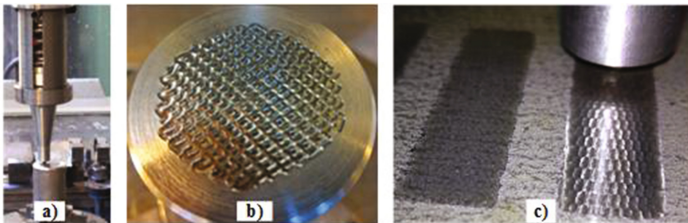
(a) CNC milling machine based setup for ball-burnishing process of flat surfaces; Ball-burnished textures on areas with: (b) circular cross section; (c) rectangular cross section.
